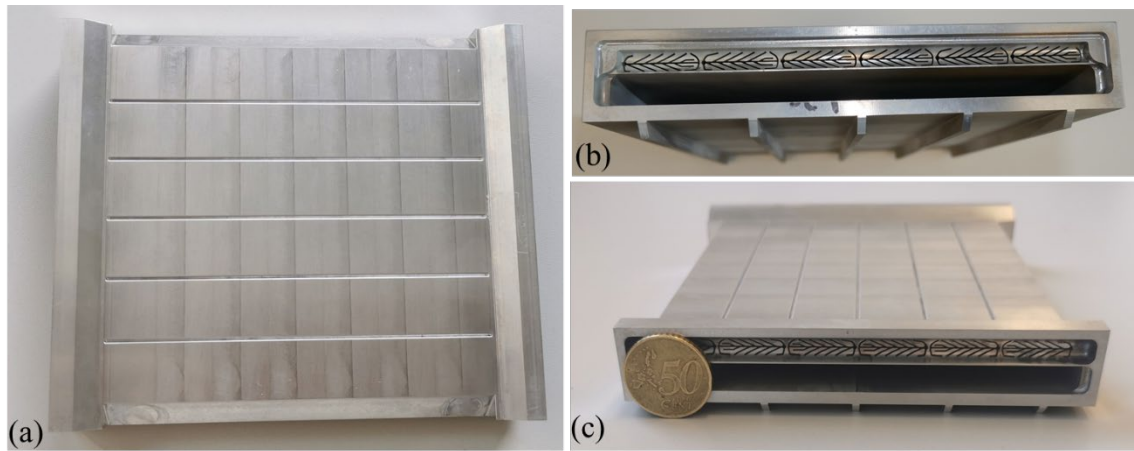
1 Aluminum prototype of HBS target fabricated with milling and EDM
